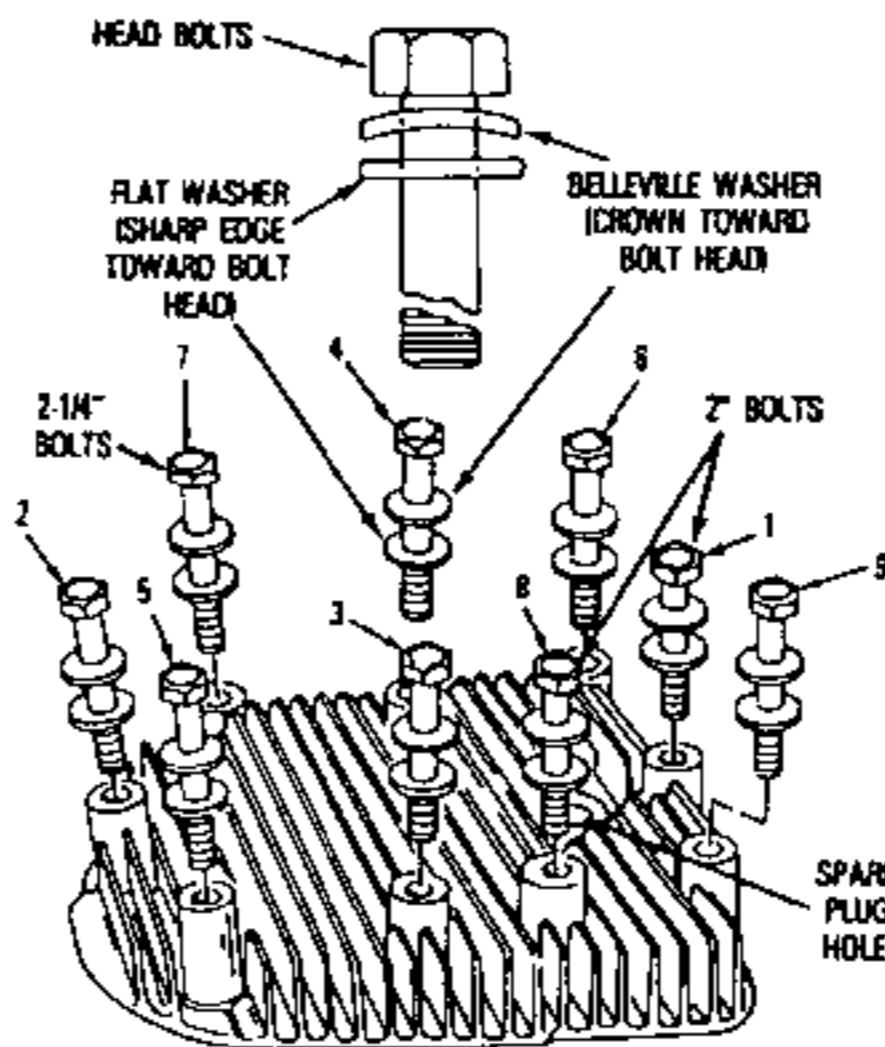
Flat washers and Belleville washers are used on cylinder head cap screws on late HH80, HH100 and HH120 and all VH80 and VH100 engines. Tighten cap screws in sequence shown to a torque of 200 in.-lbs. (22.6 N·m).
